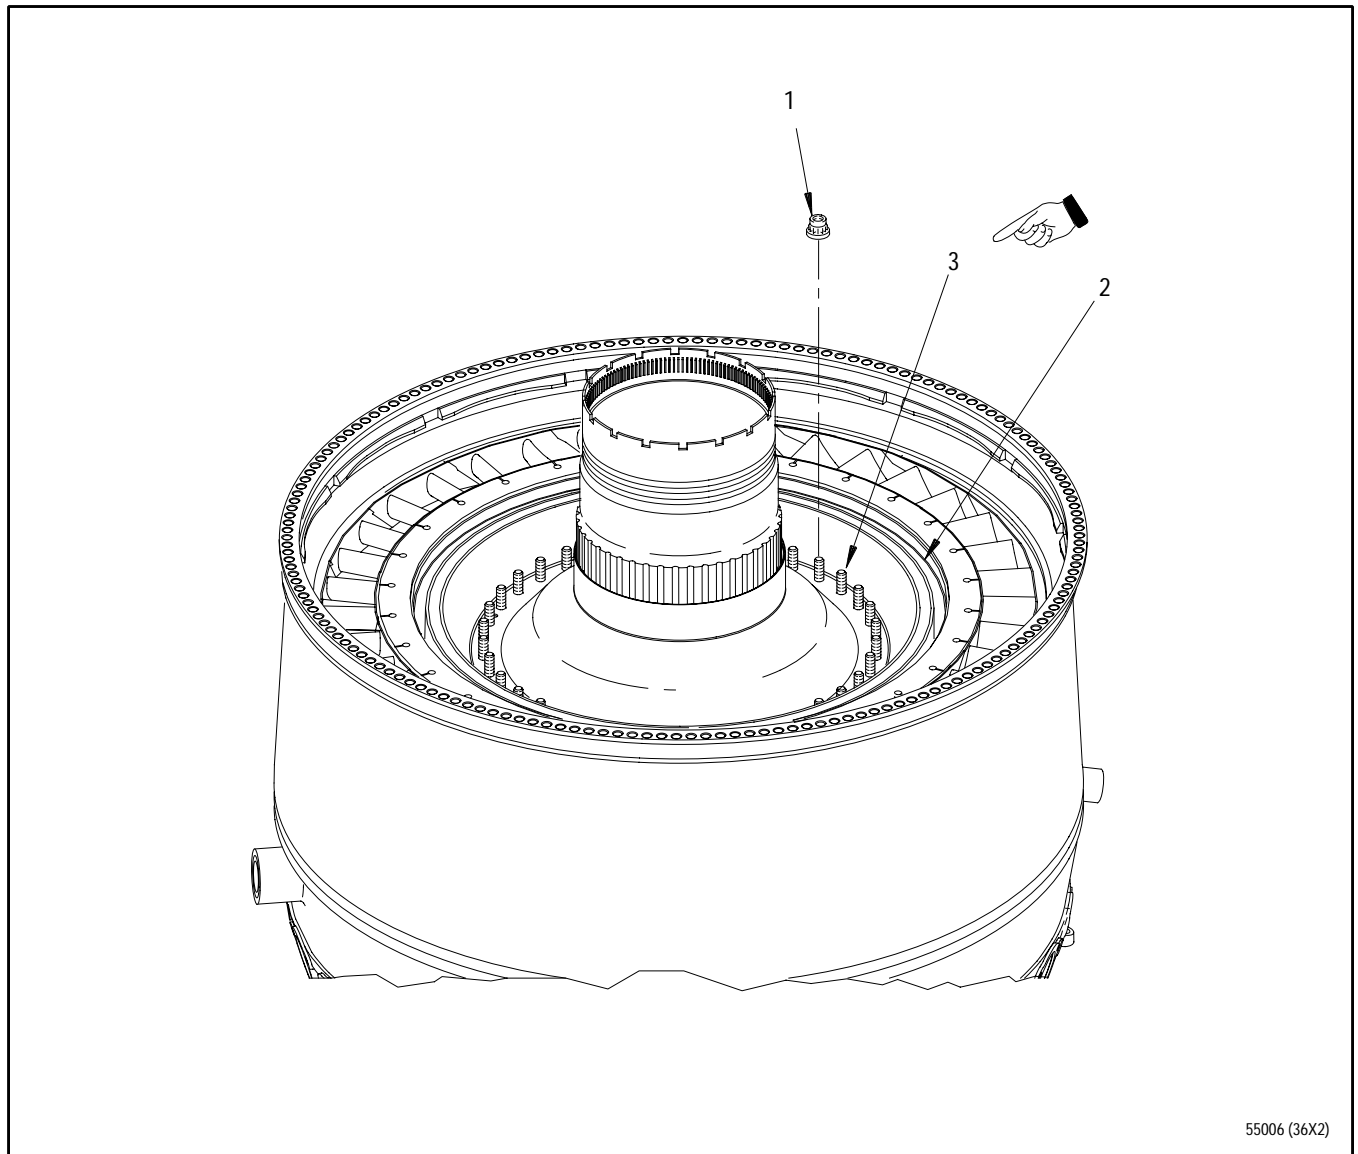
E. PWA 57919 Fixture - Installation (Sheet 2 of 2)
